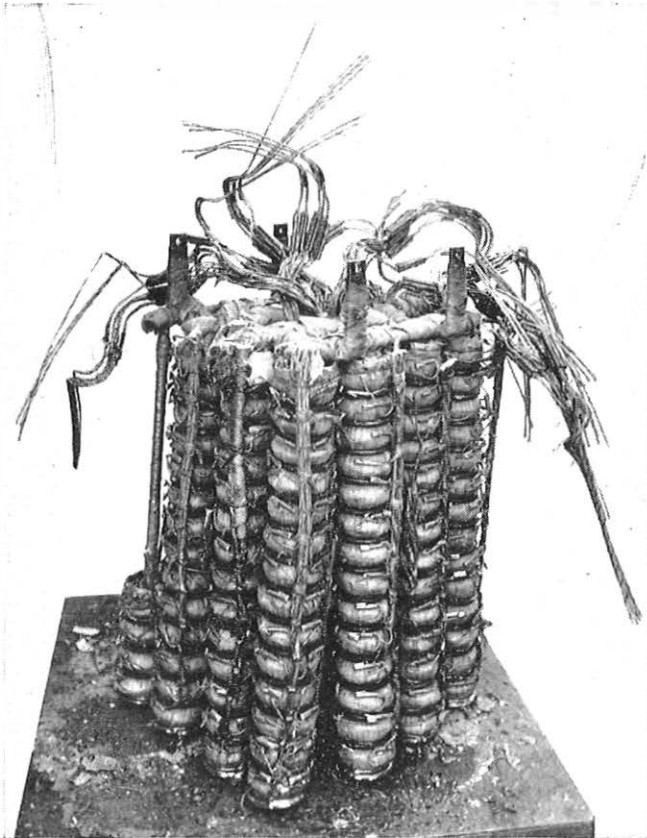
COIL ASSEMBLY AFTER SURPLUS WAX HAS BEEN REMOVED
